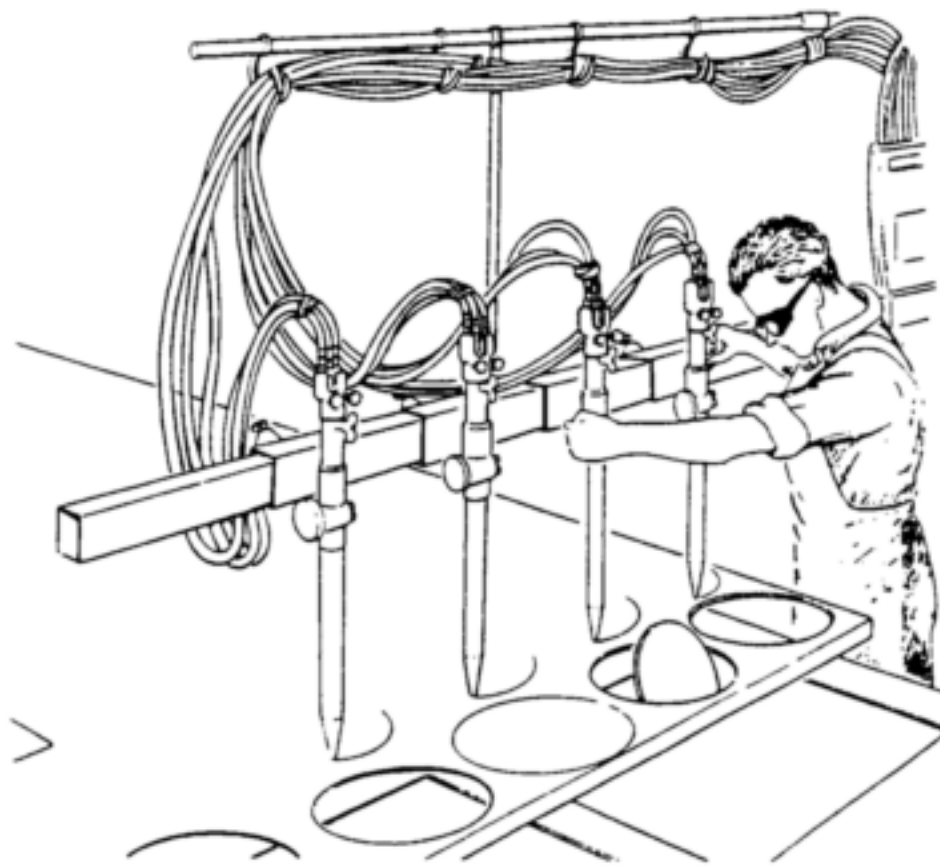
Machine for making four oxyacetylene cuts simultaneously.
